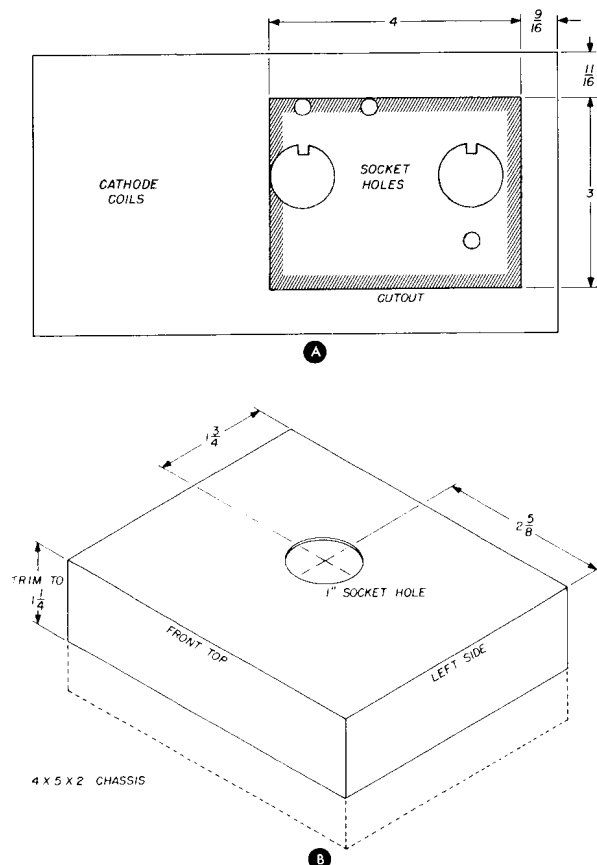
SB-200 chassis modifications to accommodate the 8875. The enclosure cutout for the sub-chassis is shown in A. The modified sub-chassis for the 8875 socket is shown in B.
